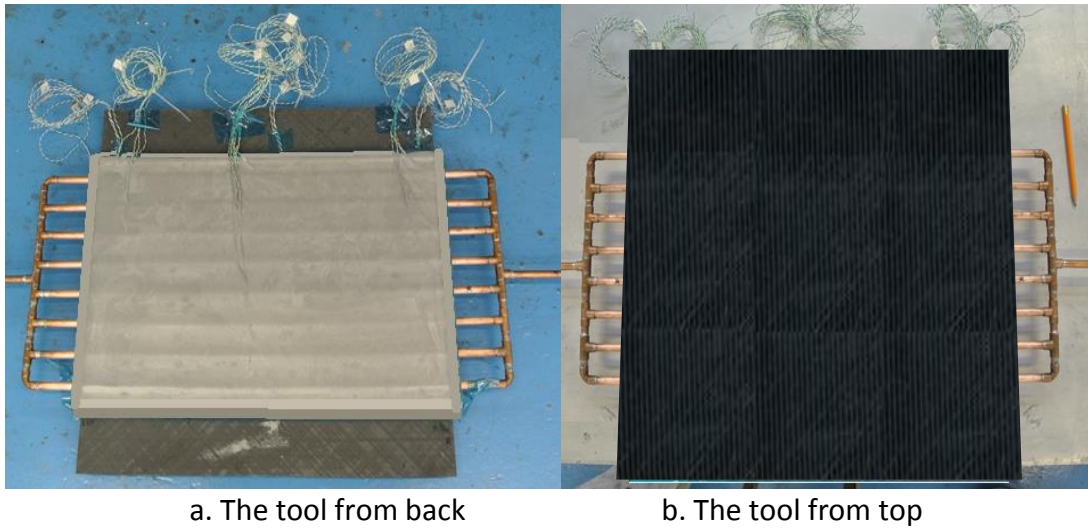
The produced experimental tool after extracting from the tool fixture
